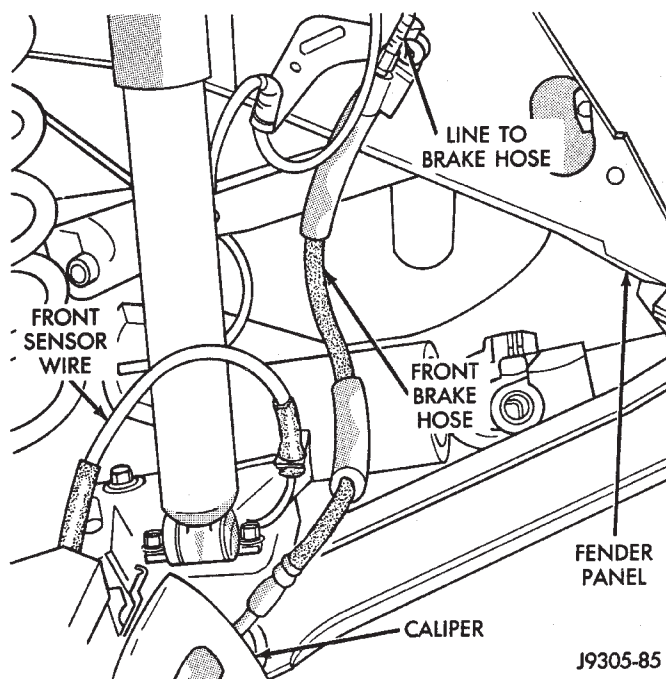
Correct Front Brake Hose Routing (Driver Side Shown)
